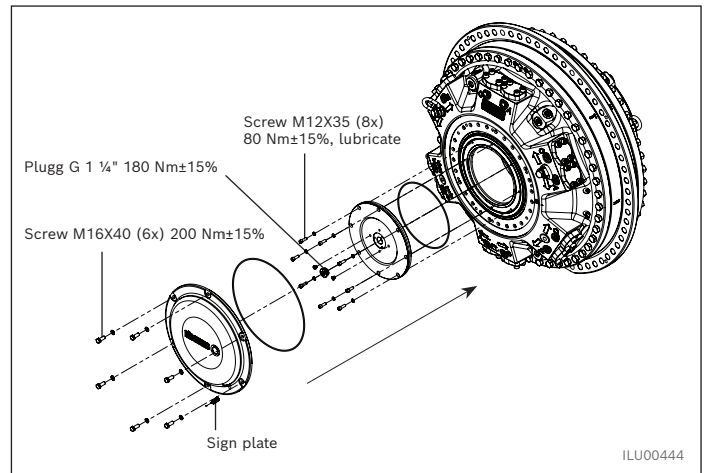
SPDC magnetized bearing holder, sign plate and cover
